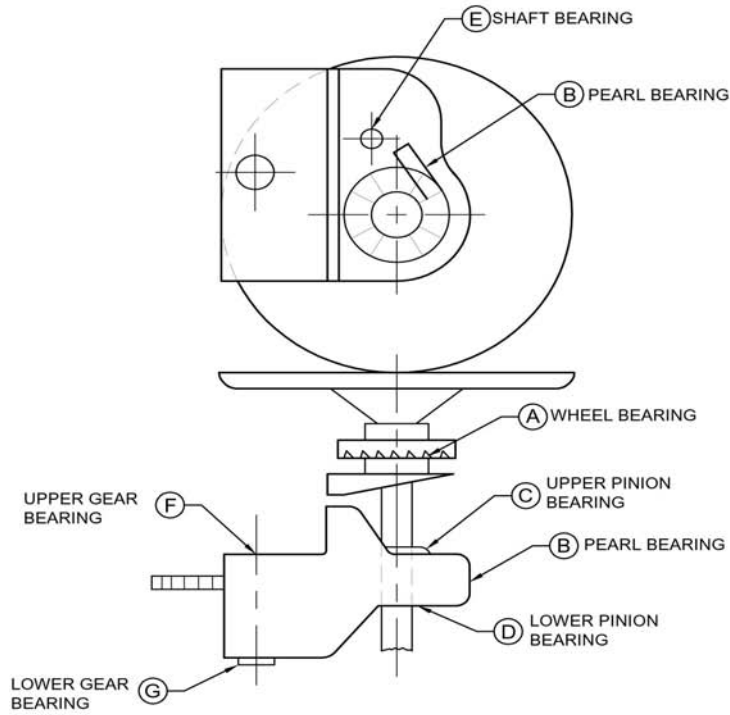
FIELD LUBRICATION CHART HORIZONTAL WHEEL TYPE HANDBRAKE
